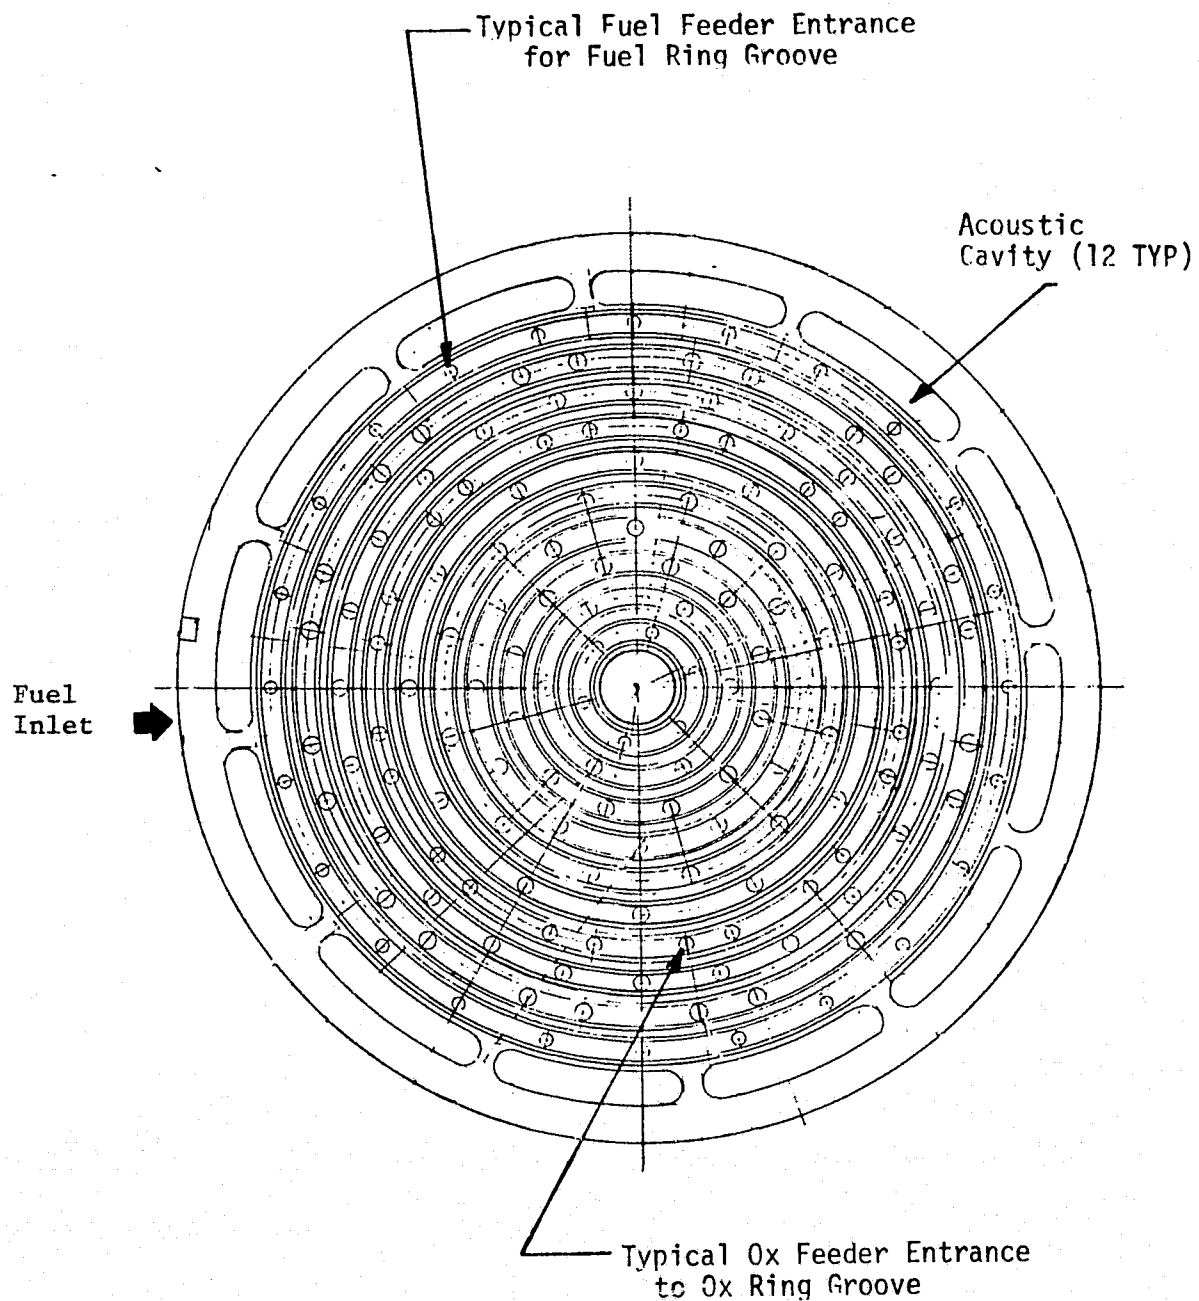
Injector-End View of Rocketdyne OME Technology Injector Housing Showing Ring Grooves and Feeder Entrances to Ring Grooves
